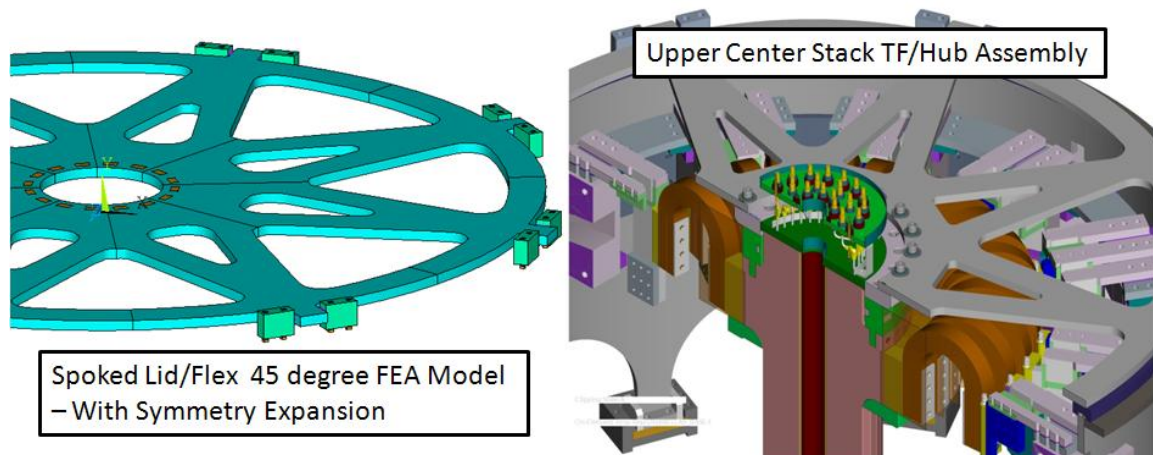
Upper Spoked Lid Model (left) and Machine Section (right)
